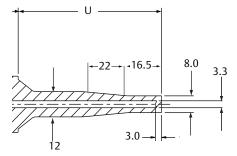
Welded Barstock Thermowell (6 mm)
